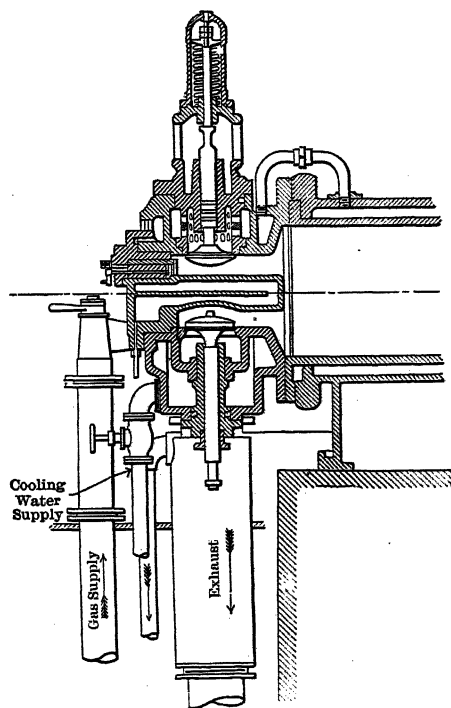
Koerting Valve Gear. Longitudinal Section through Cylinder.
